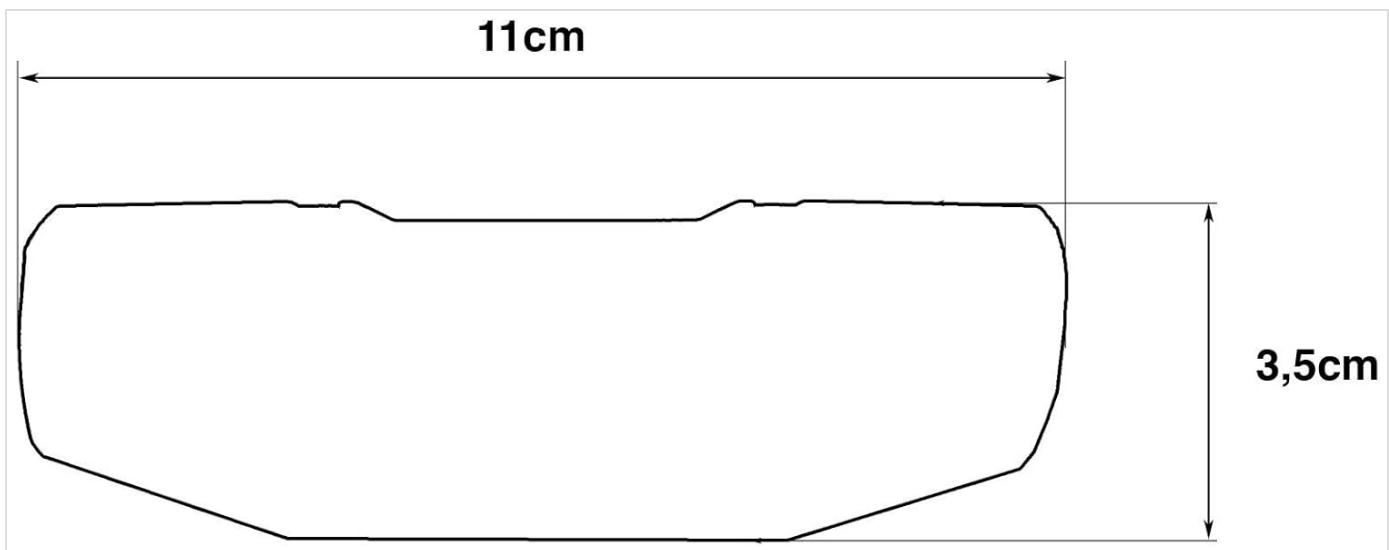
Technical drawing illustrating the dimensions of the AXA Blueline Rear Light, showing a length of 11 cm and a height of 3.5 cm.
